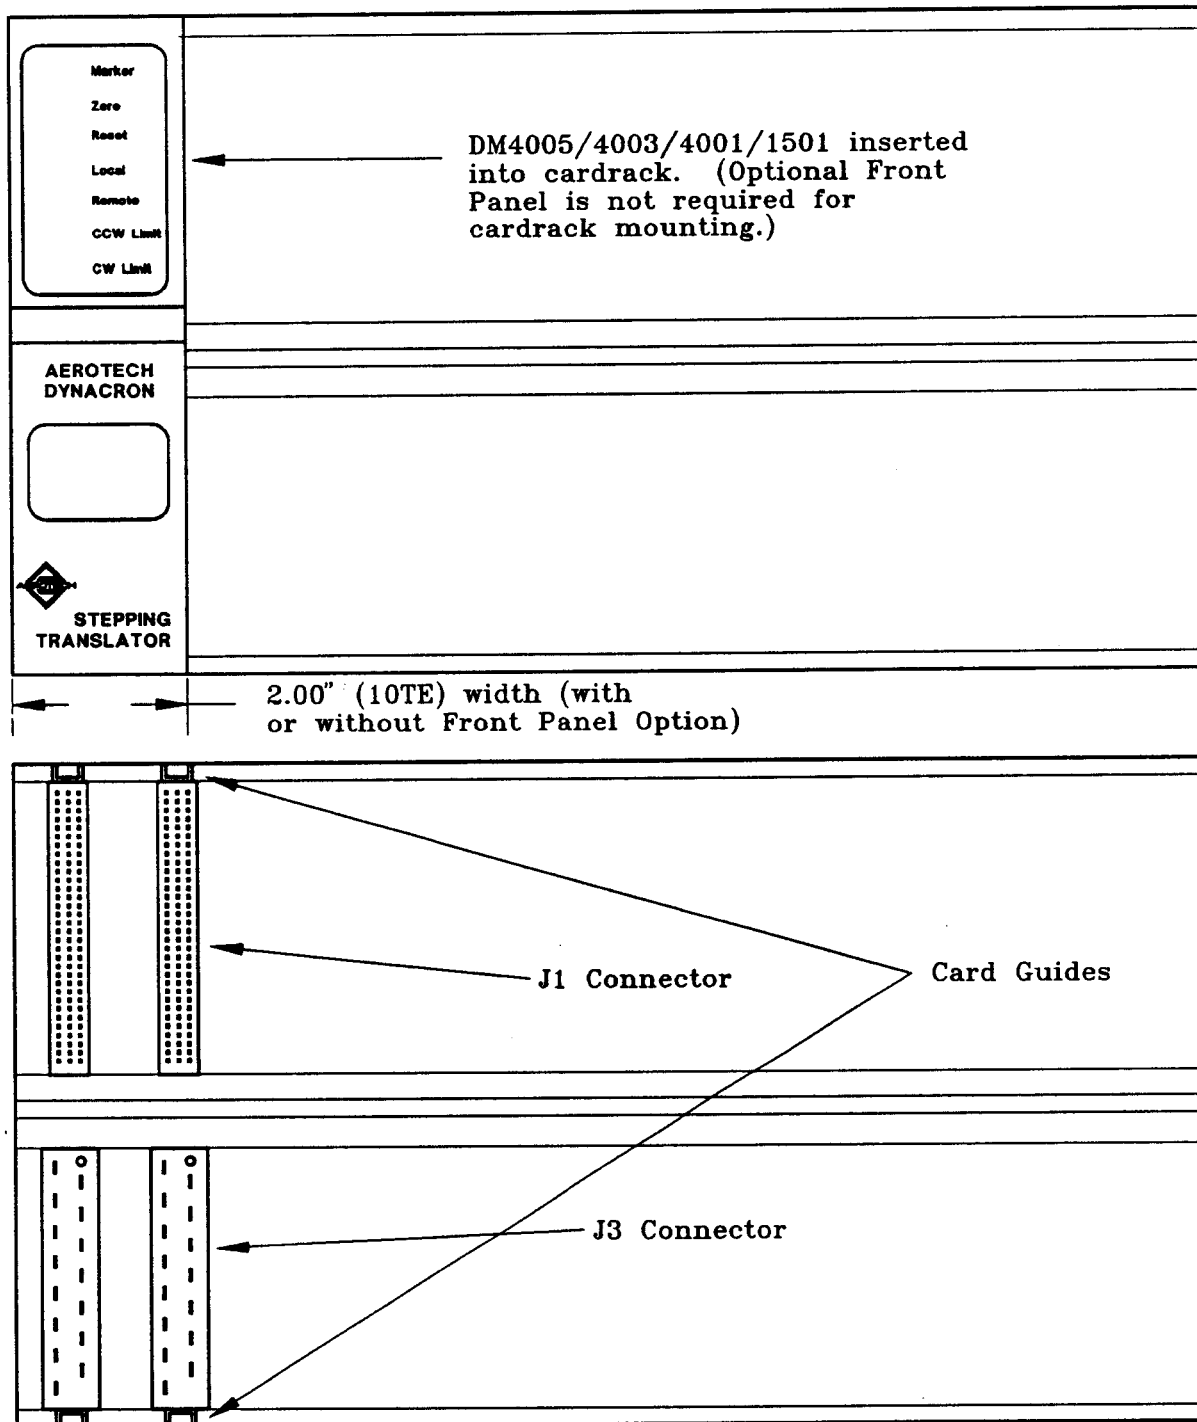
Typical 6U Cardrack Mounting of DM4005/4003/4001/1501
